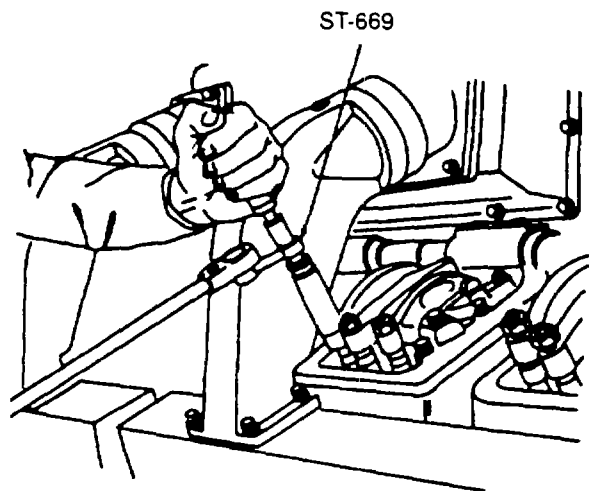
Tightening Rocker Lever Adjusting Screw Locknuts
